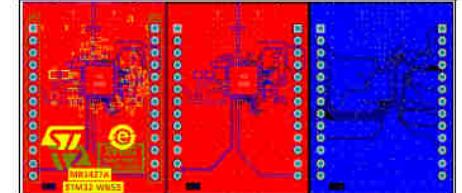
PCB layout for VFQFPN68 (left to right: all, top and bottom layers)
